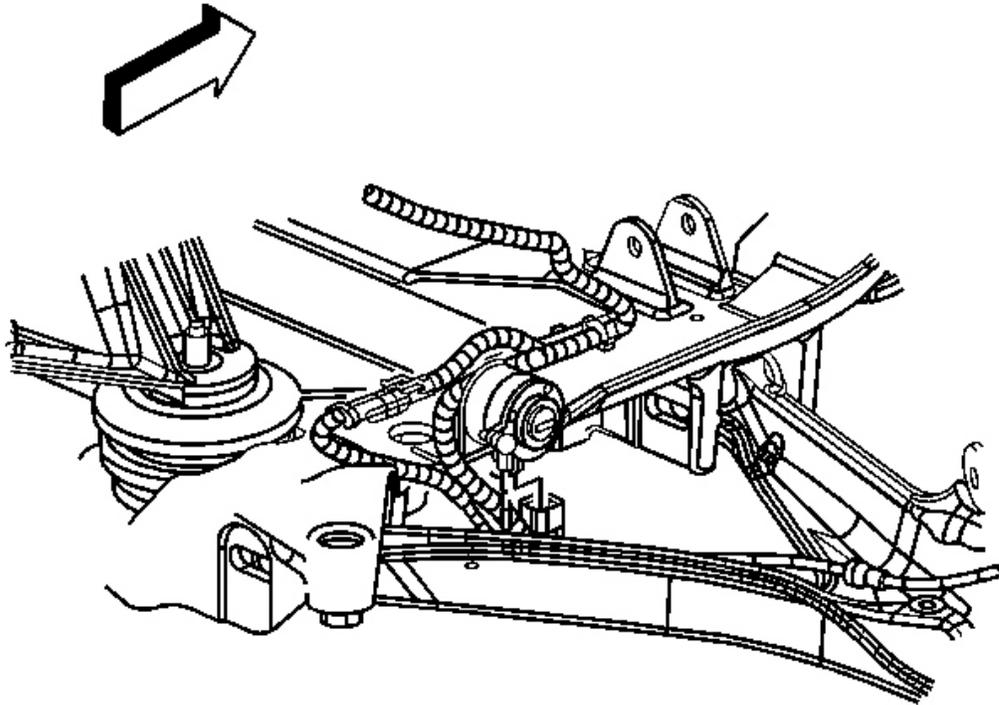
View Of Road Sensing Suspension Position Sensor Links & Lower Control Arm
